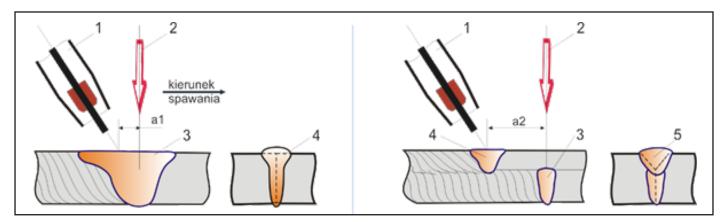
Schematic diagrams presenting the simultaneous welding with laser and electric arc: a) schematic diagram of the hybrid laser + electric arc welding process (1- arc welding torch, 2 – laser beam, 3 – liquid metal pool common for both methods, 4 – weld in cross-section; b) schematic diagram of the combined laser + electric arc welding process (1 - arc welding torch 2 – laser beam, 3 – molten metal pool formed as a result of the laser beam effect, 4 - molten metal pool formed as a result of arc effect, 5 - weld in cross-section); a1, a2 – distance between the electrode wire tip and the laser beam axis [9]
